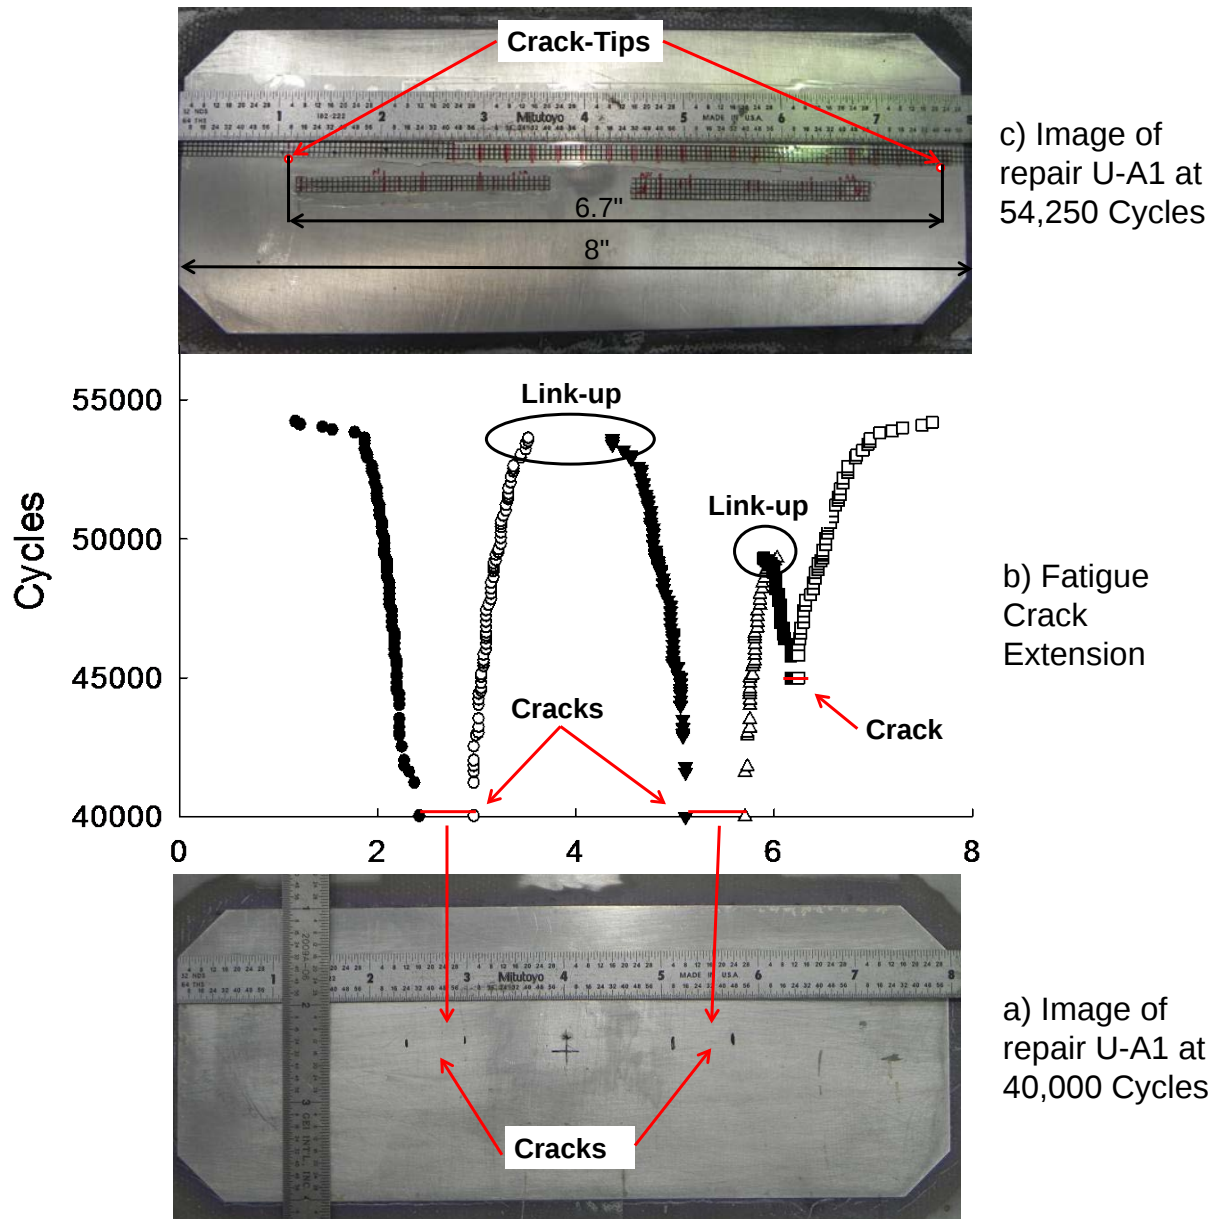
Link up of external cracks on U-A1 patch: (a) image of U-A1 repair at 40,000 cycles, (b) fatigue crack extension showing link up of cracks, and (c) image of U-A1 repair at 54,250 cycles showing 6.7"-long crack
